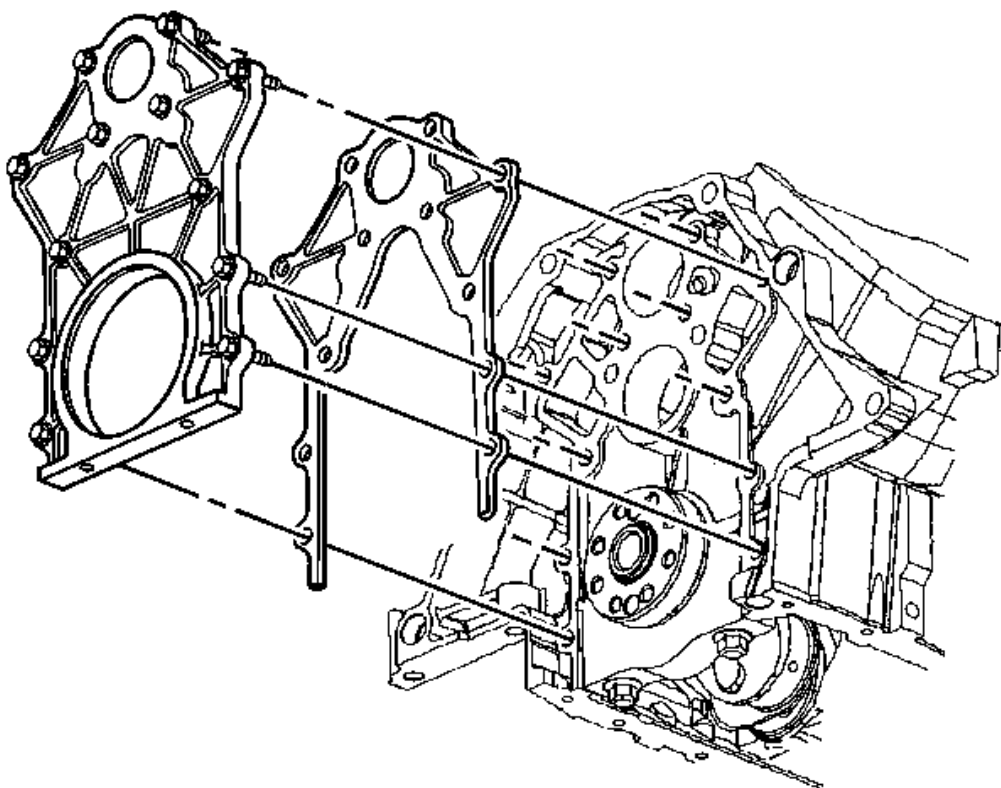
Removing Crankshaft Rear Oil Seal Housing
